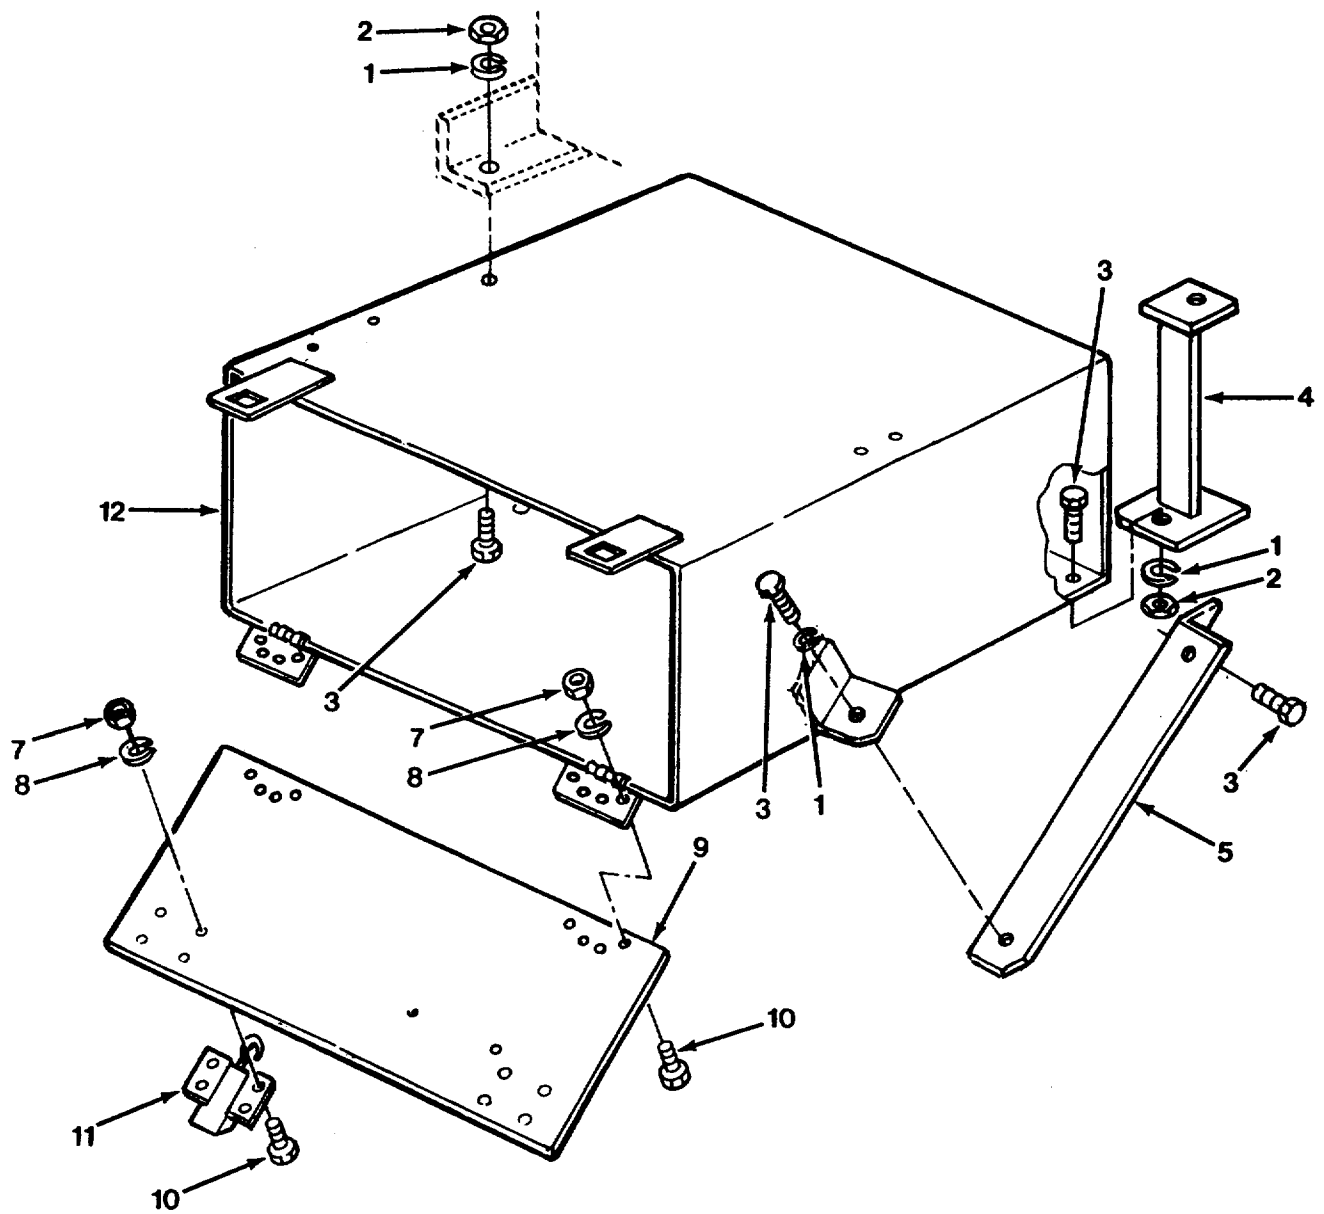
EXTENSION STOWAGE BOX ASSEMBLY
